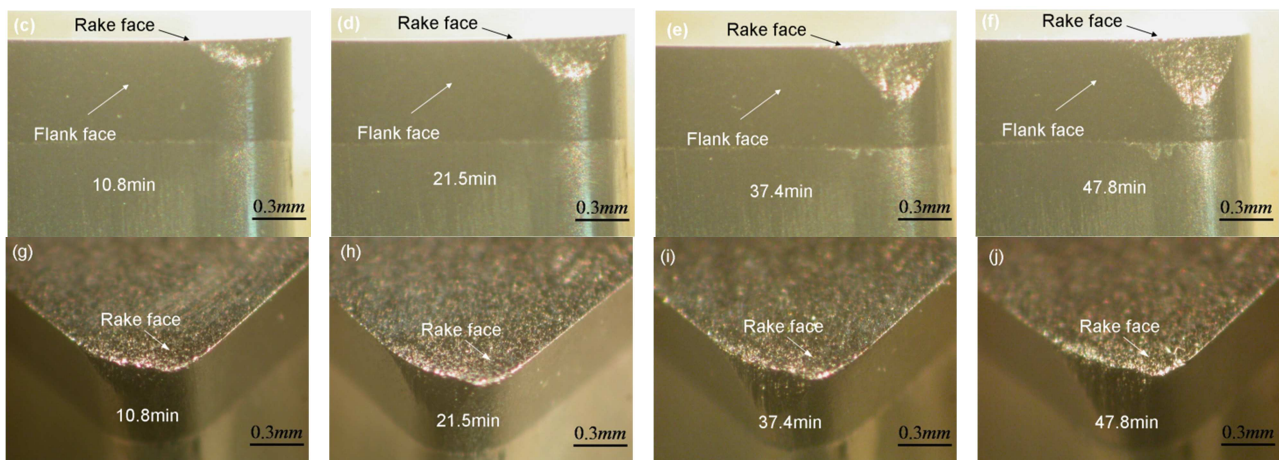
Optical microscope images of a tool flank face (c-f) and rake face (g-j) at different cutting time (PCD 030, in wet condition, cutting speed: 120 m/min, feed rate: 0.1 mm/rev, and depth of cut: 0.15 mm).
